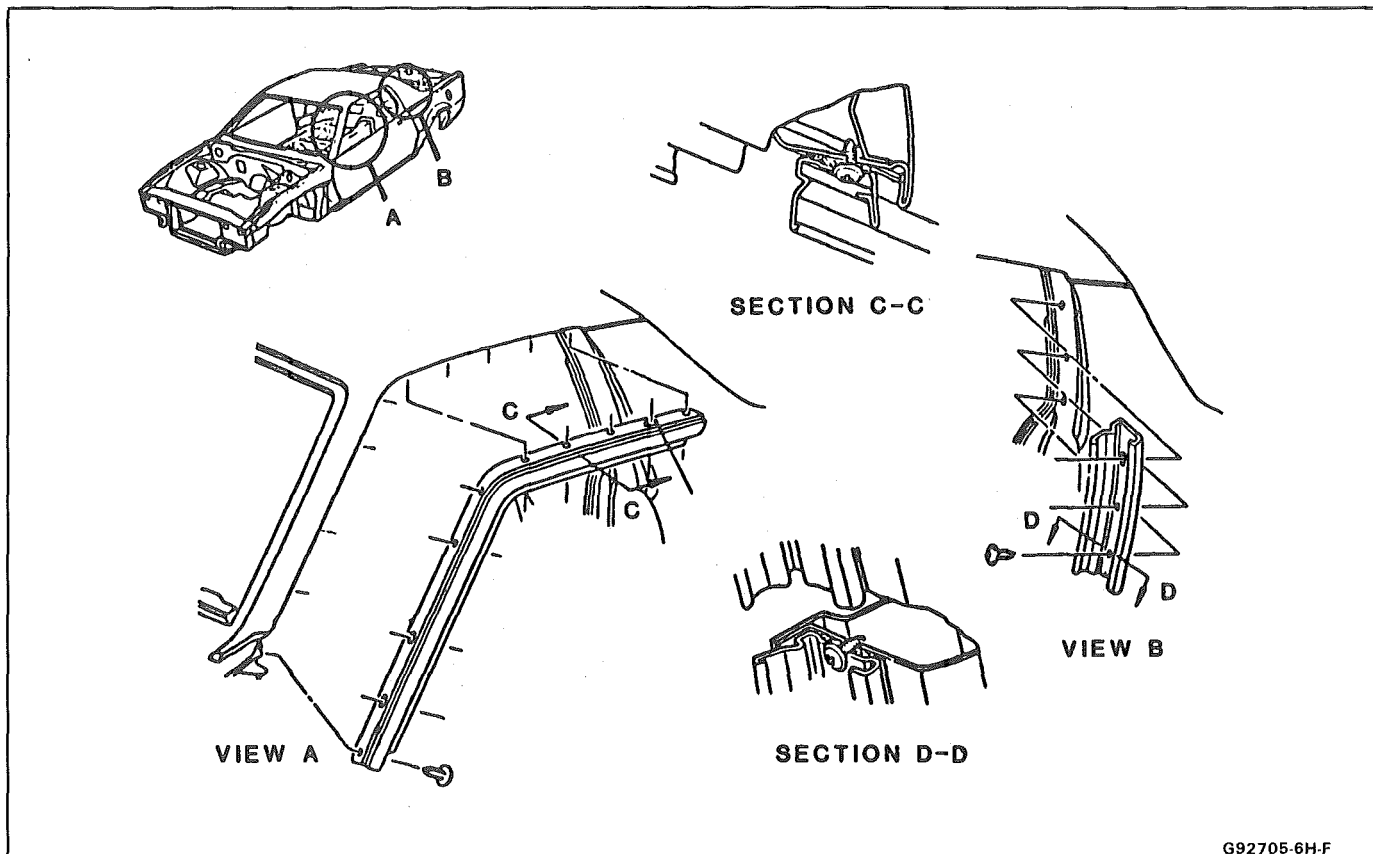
Installing Roof Drip and Quarter to Body Reveal Molding
